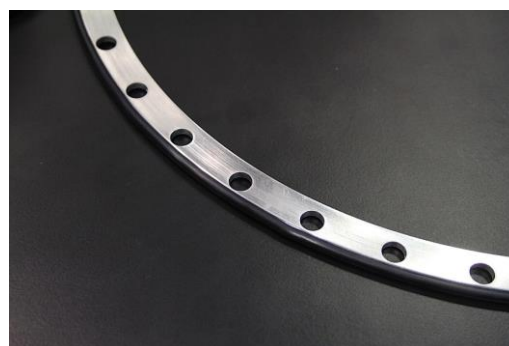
A nitrile O-ring, seated by an aluminium spacer, can form a seal between the two wheel shells.
